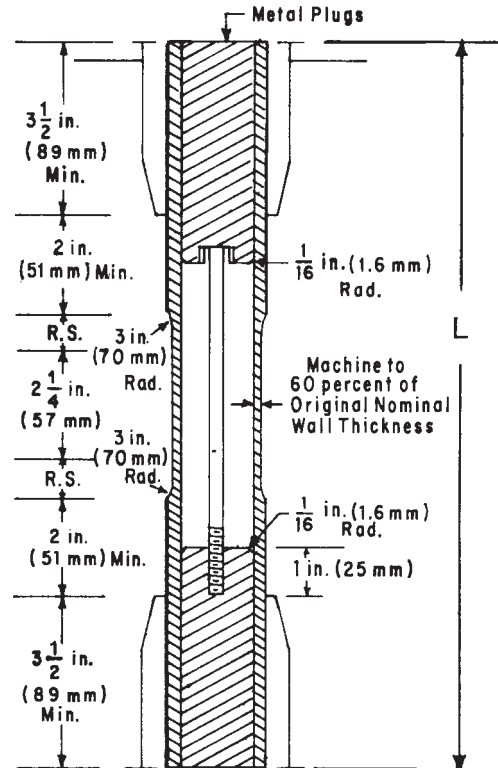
Diagram Showing Location of Tube Tension Test Specimen in Testing Machine
